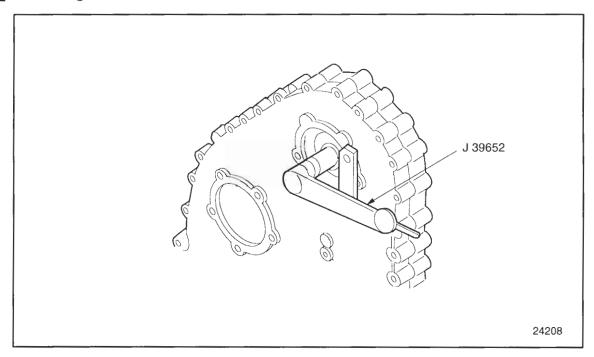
Camshaft Drive Gear–to–Camshaft Bolt Tightening
